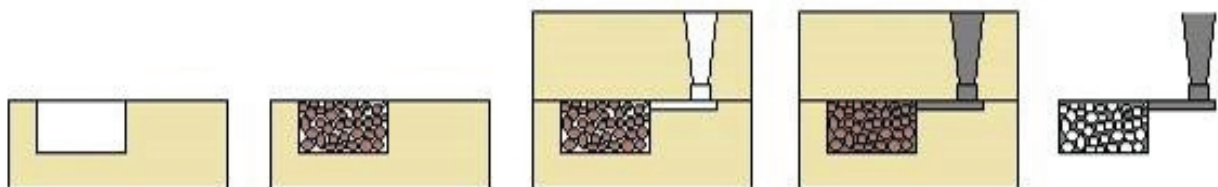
Principle of infiltration of molten metal into mould filled with precursors, from left: mould, mould cavity filled with precursors, composite foundry mould, pouring molten metal into mould cavity, cast metallic foam after removing precursors
